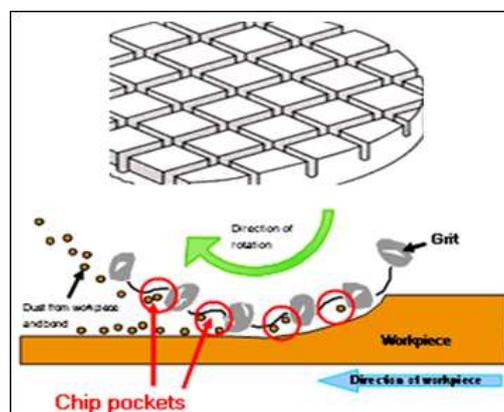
Wafer saw mechanism showing how chipping pockets occur.
